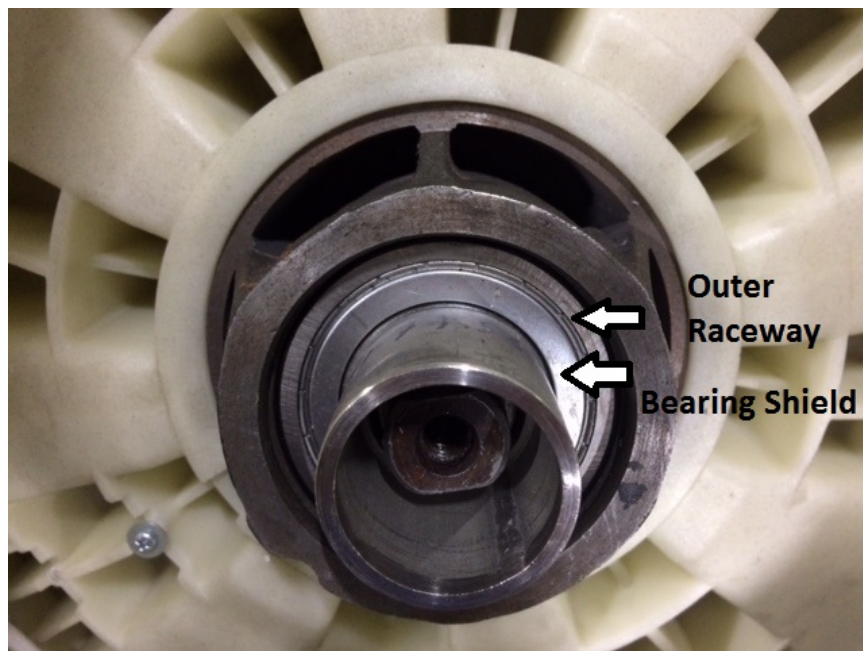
Shaft end should be flush with pulley-wheel bolt mounting surface.
